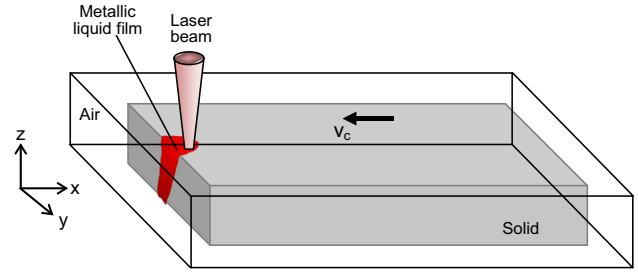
Representation of the workpiece surrounded by air. The laser beam is displaced over the sample surface
